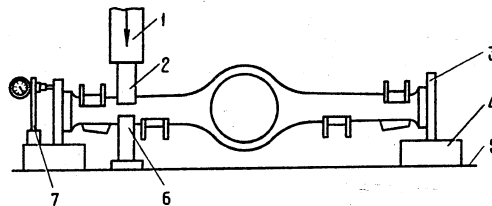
Straightening the Rear Axle Beam. Diagrammatic:
